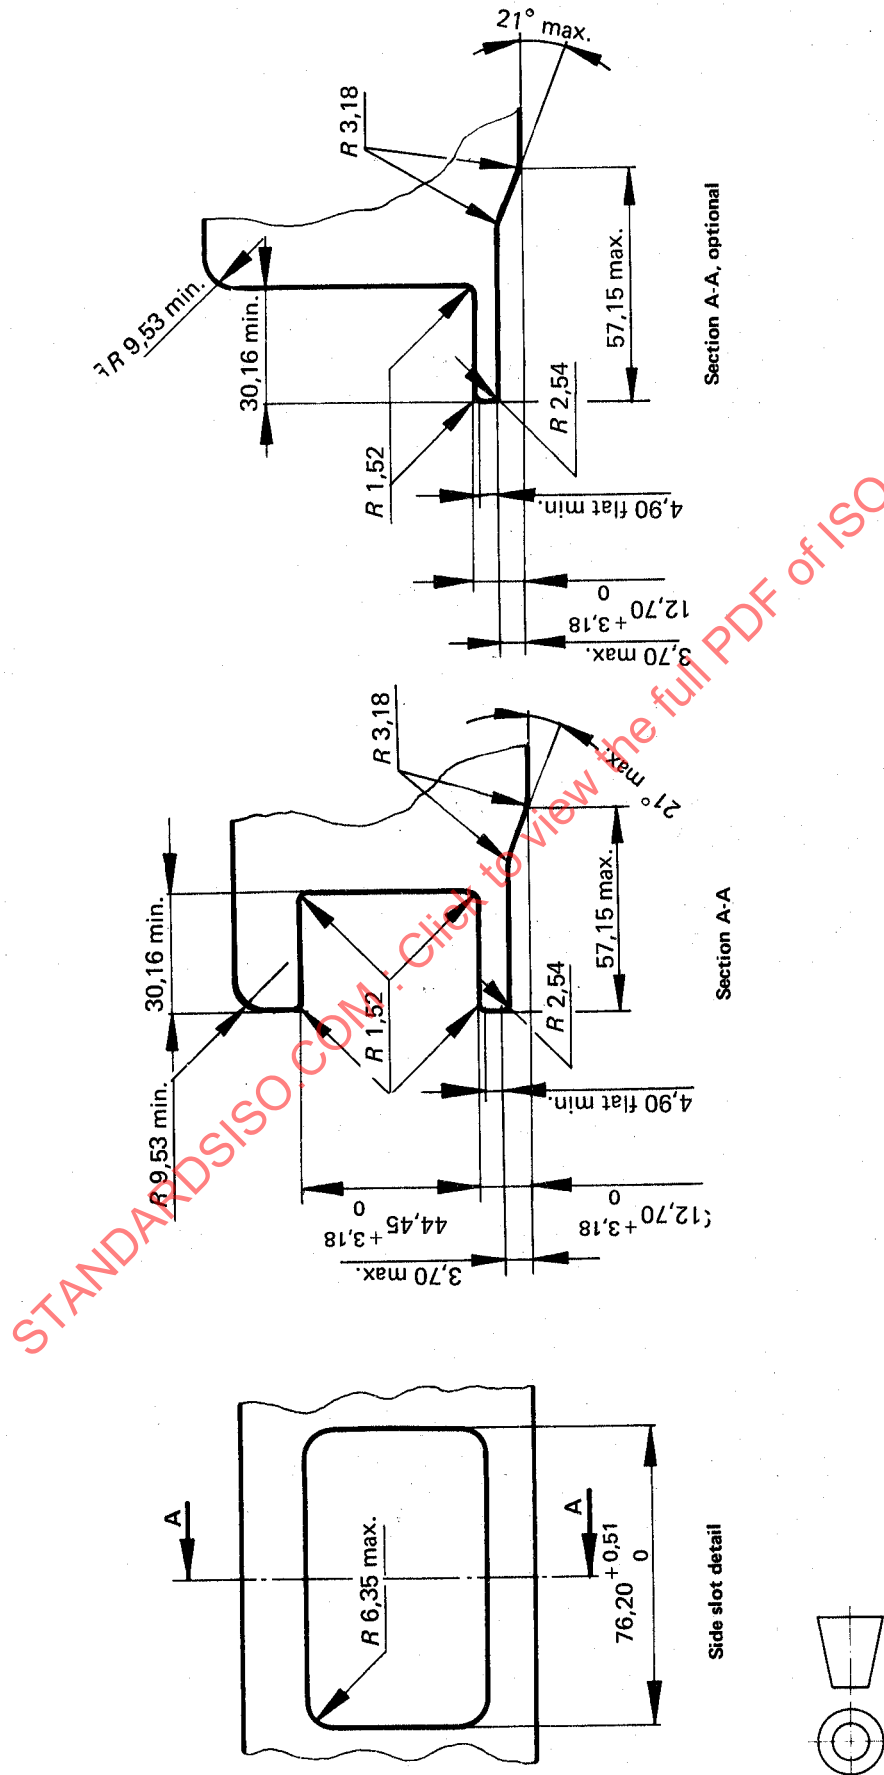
Side slot detail, recessed edge option, Type A pallet — Dimensions in millimetres
